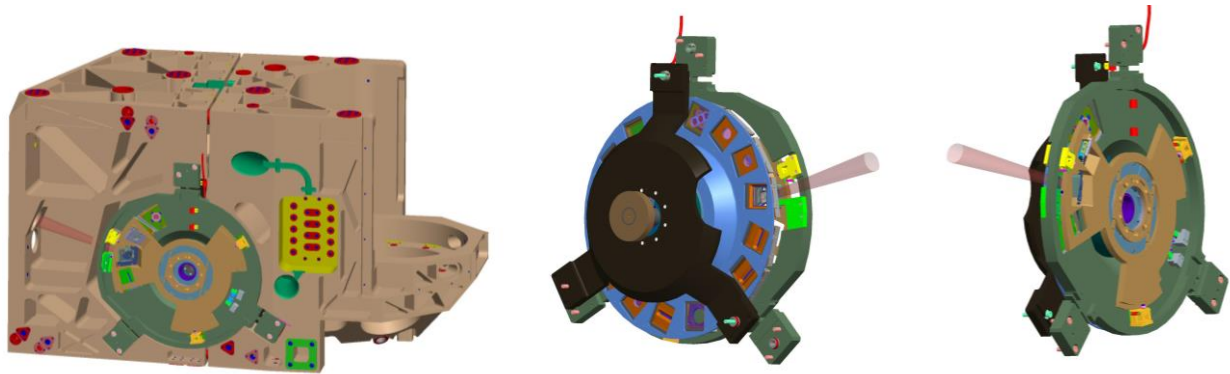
The FP2 wheel assembly mounted on the backbone structure of the METIS CFO (left), the front side of the assembly (middle) and the rear side (right) of the assembly.
